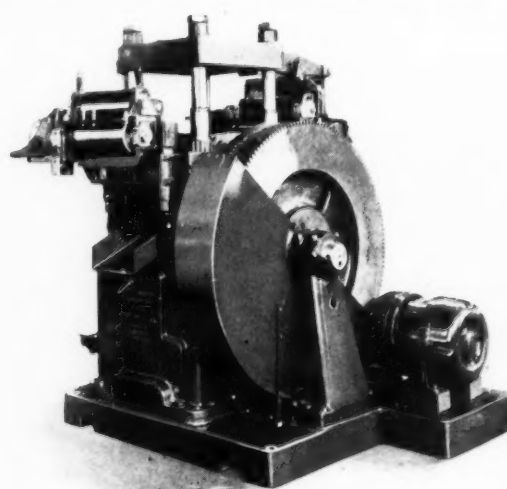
Henry & Wright Dieing Machine with a Capacity of Fifty Tons
